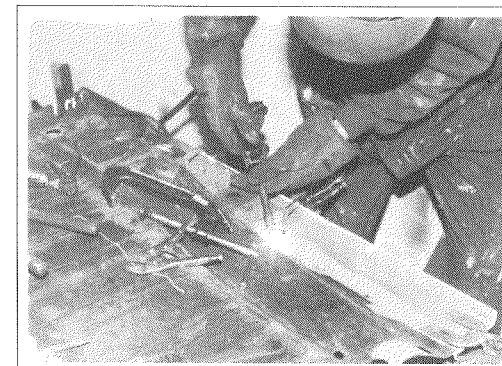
clamped up, and welded in place. Job done.
